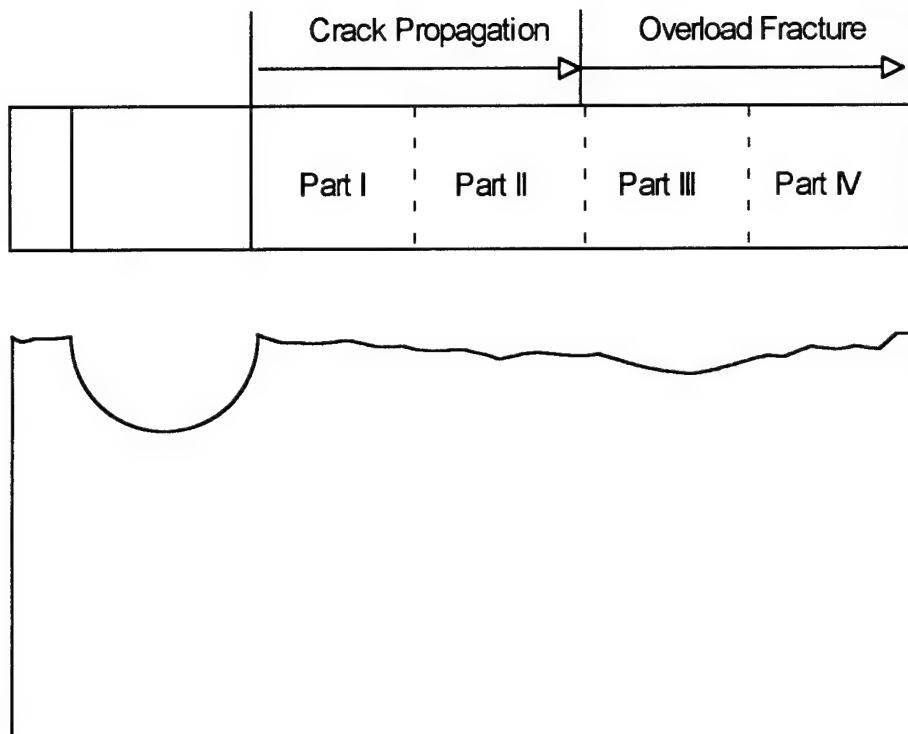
Schematic showing sectioning of the open hole specimens for fractographic studies. Part I is next to the open hole crack initiation region.
